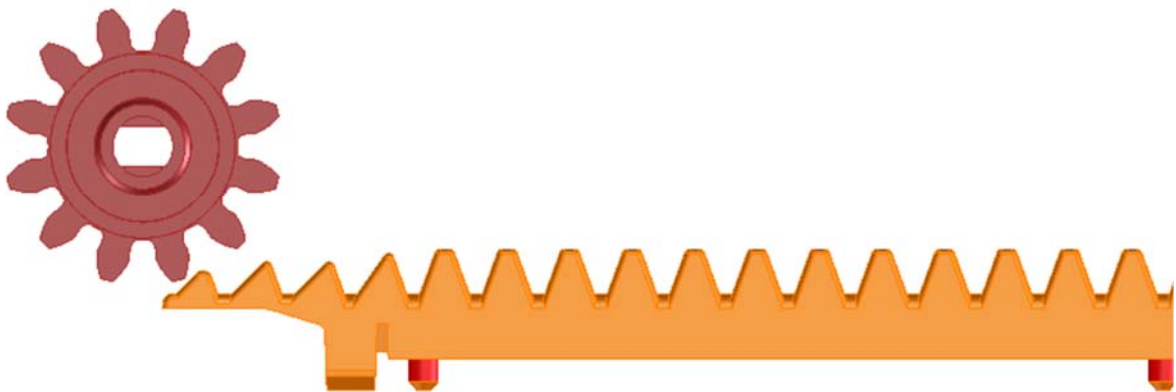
Modified rack profile to allow automeshing of pinion gear
